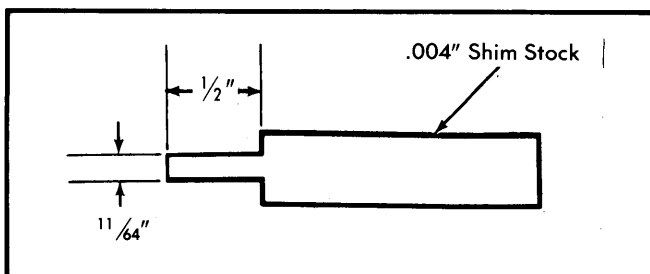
Rear Main Bearing Oil Seal Installation Tool
